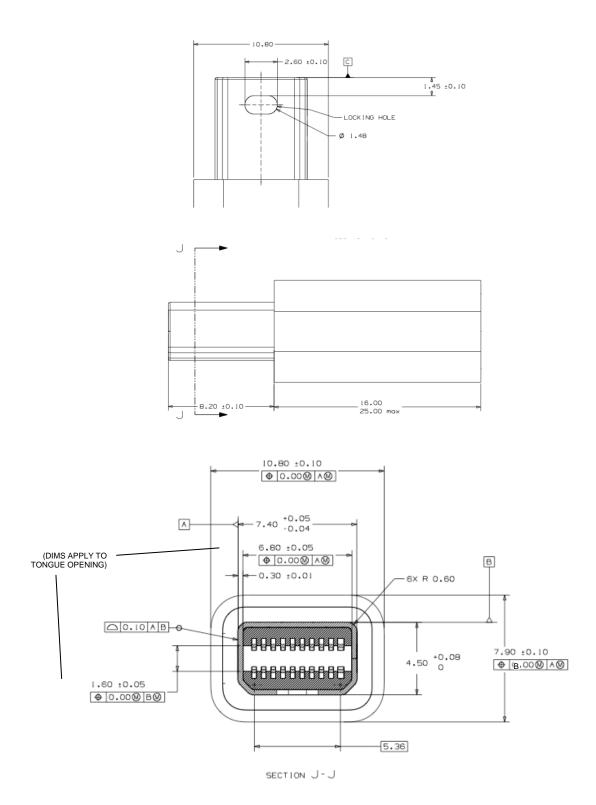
Mini DisplayPort Cable-Connector Dimensions – 2
